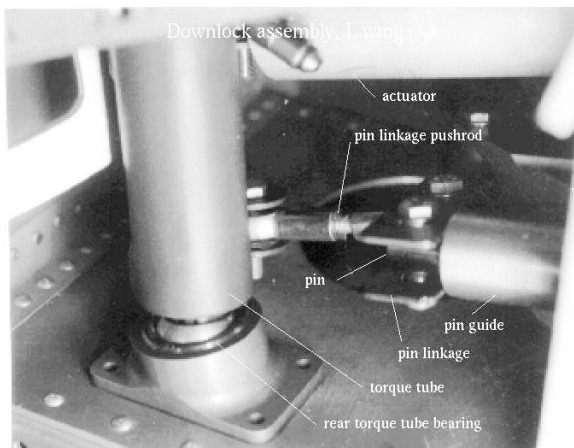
Positioning the torque tube. You are looking at the left wing from the bottom.
